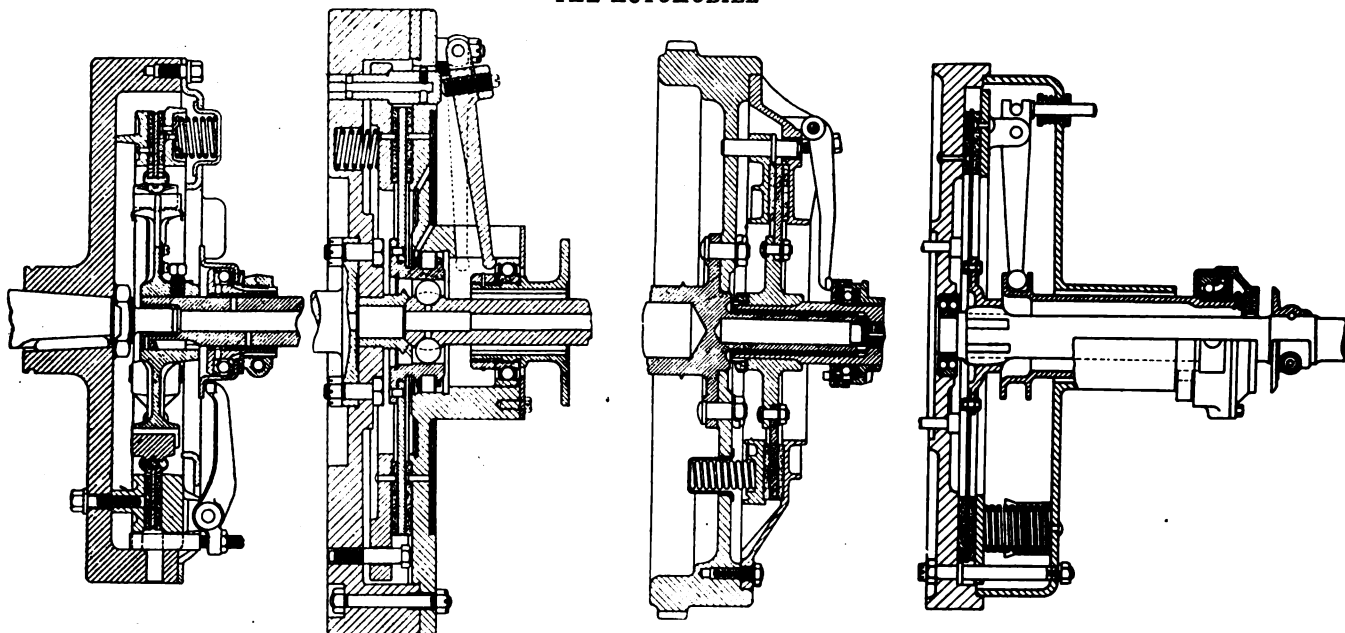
The Autocar clutch. Fig. 7—The Dennis 2-ton clutch Fig. 8—The 40 to 50-hp. Napier clutch. Fig. 9—The Bristol 4-ton clutch
